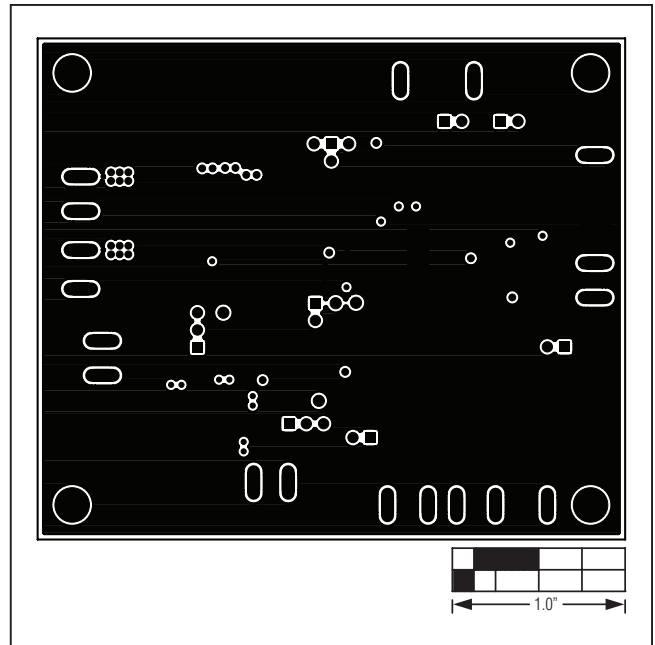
MAX16929 EV Kit PCB Layout—Solder Side
